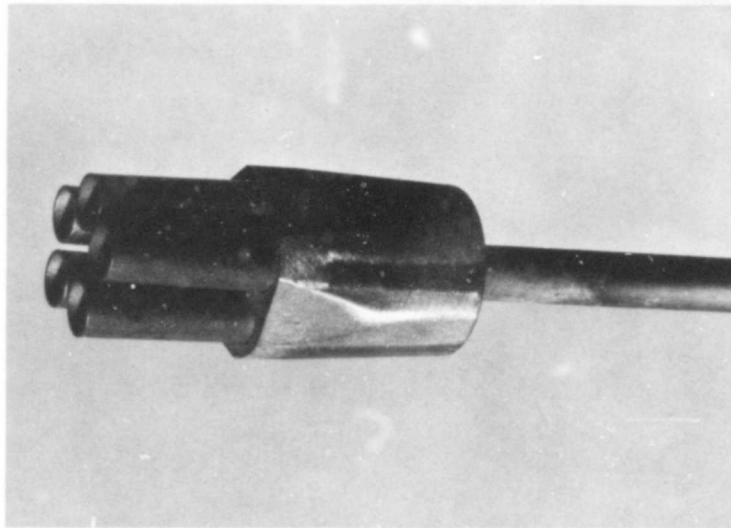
Tube Specimen of 5/16 in. 4130 Steel on Specimen Holder
